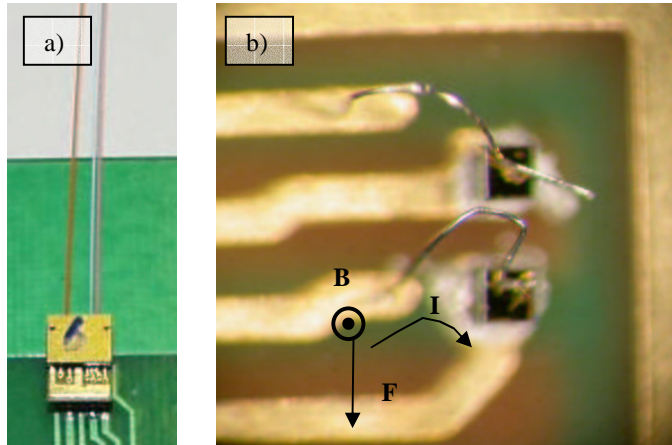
Forward Opto-Package photographs. a) shows the overall package with the wires out of view. b) shows the bond wires from the gold tracks to the VCSEL chips.
